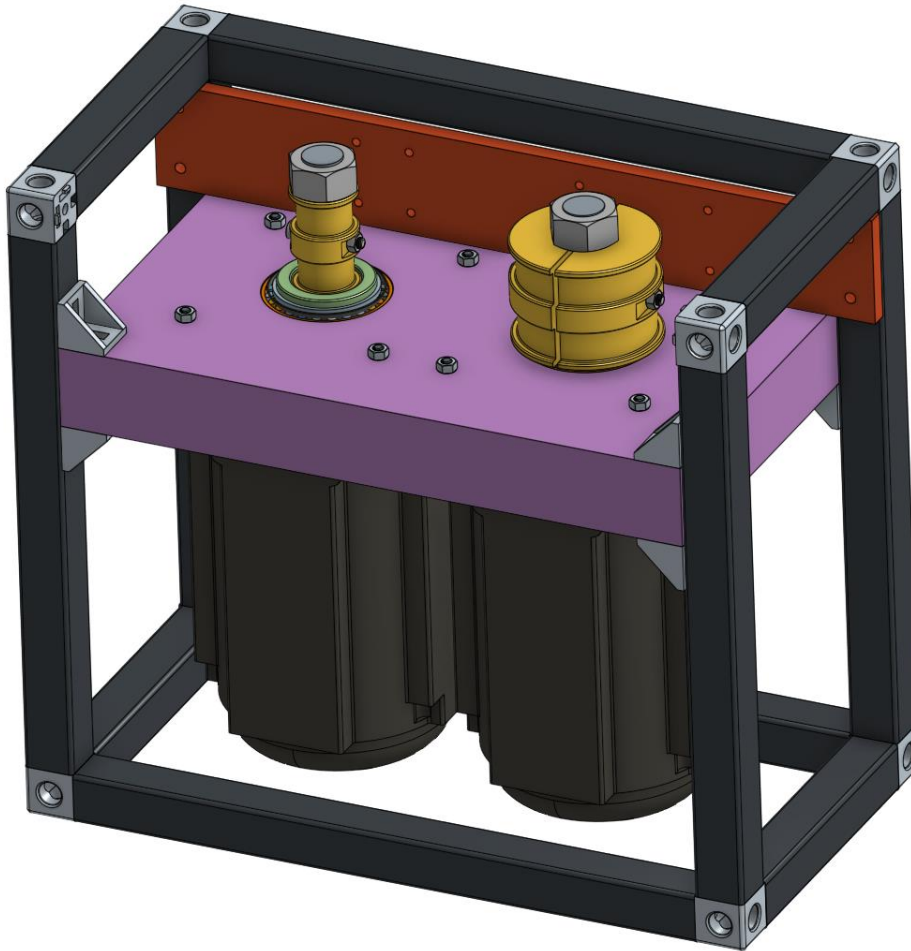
Isometric view of the offboard system mechanical assembly. One aluminum cross-bar has been hidden to show the sheaves more clearly.
